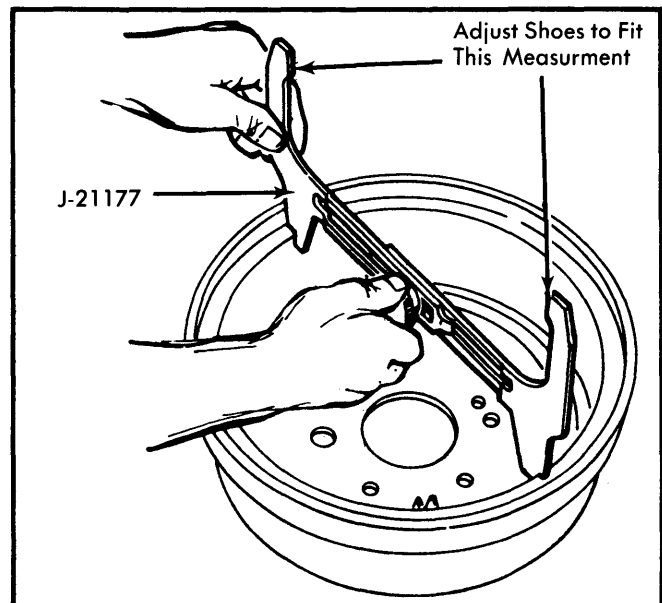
Measuring Drum Inside Diameter for Brake Shoe Clearance
